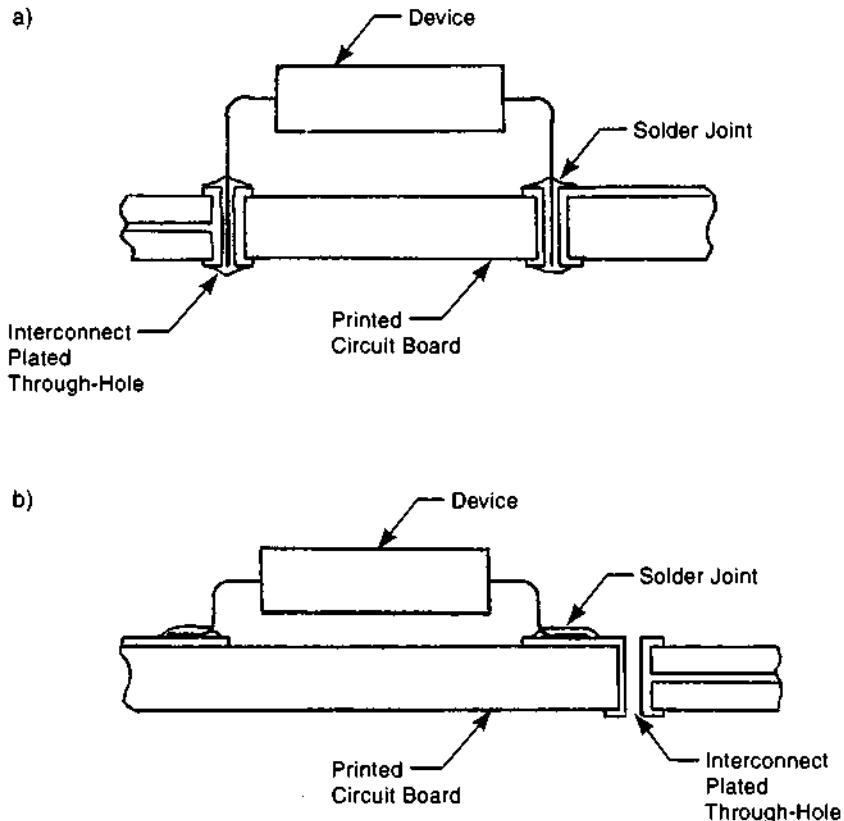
B1 Two common types of connections of electronic devices to printed circuit boards: a) through-hole attachment, b) surface-mount attachment.
